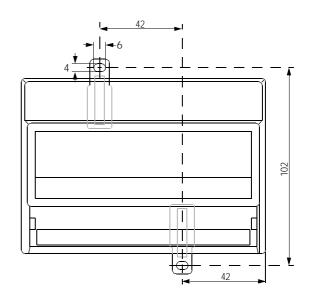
Dimensional Drawing for Wall Mounting (front view)
